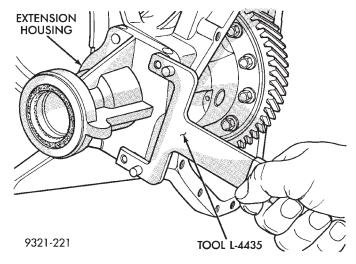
Remove or Install Extension (Front Wheel Drive vehicles)
